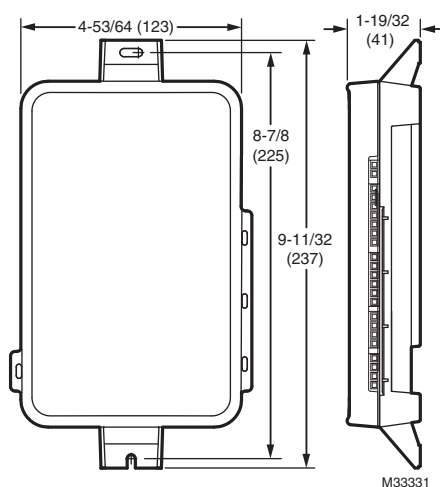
Dimensions of Equipment Interface Module in in. (mm).
